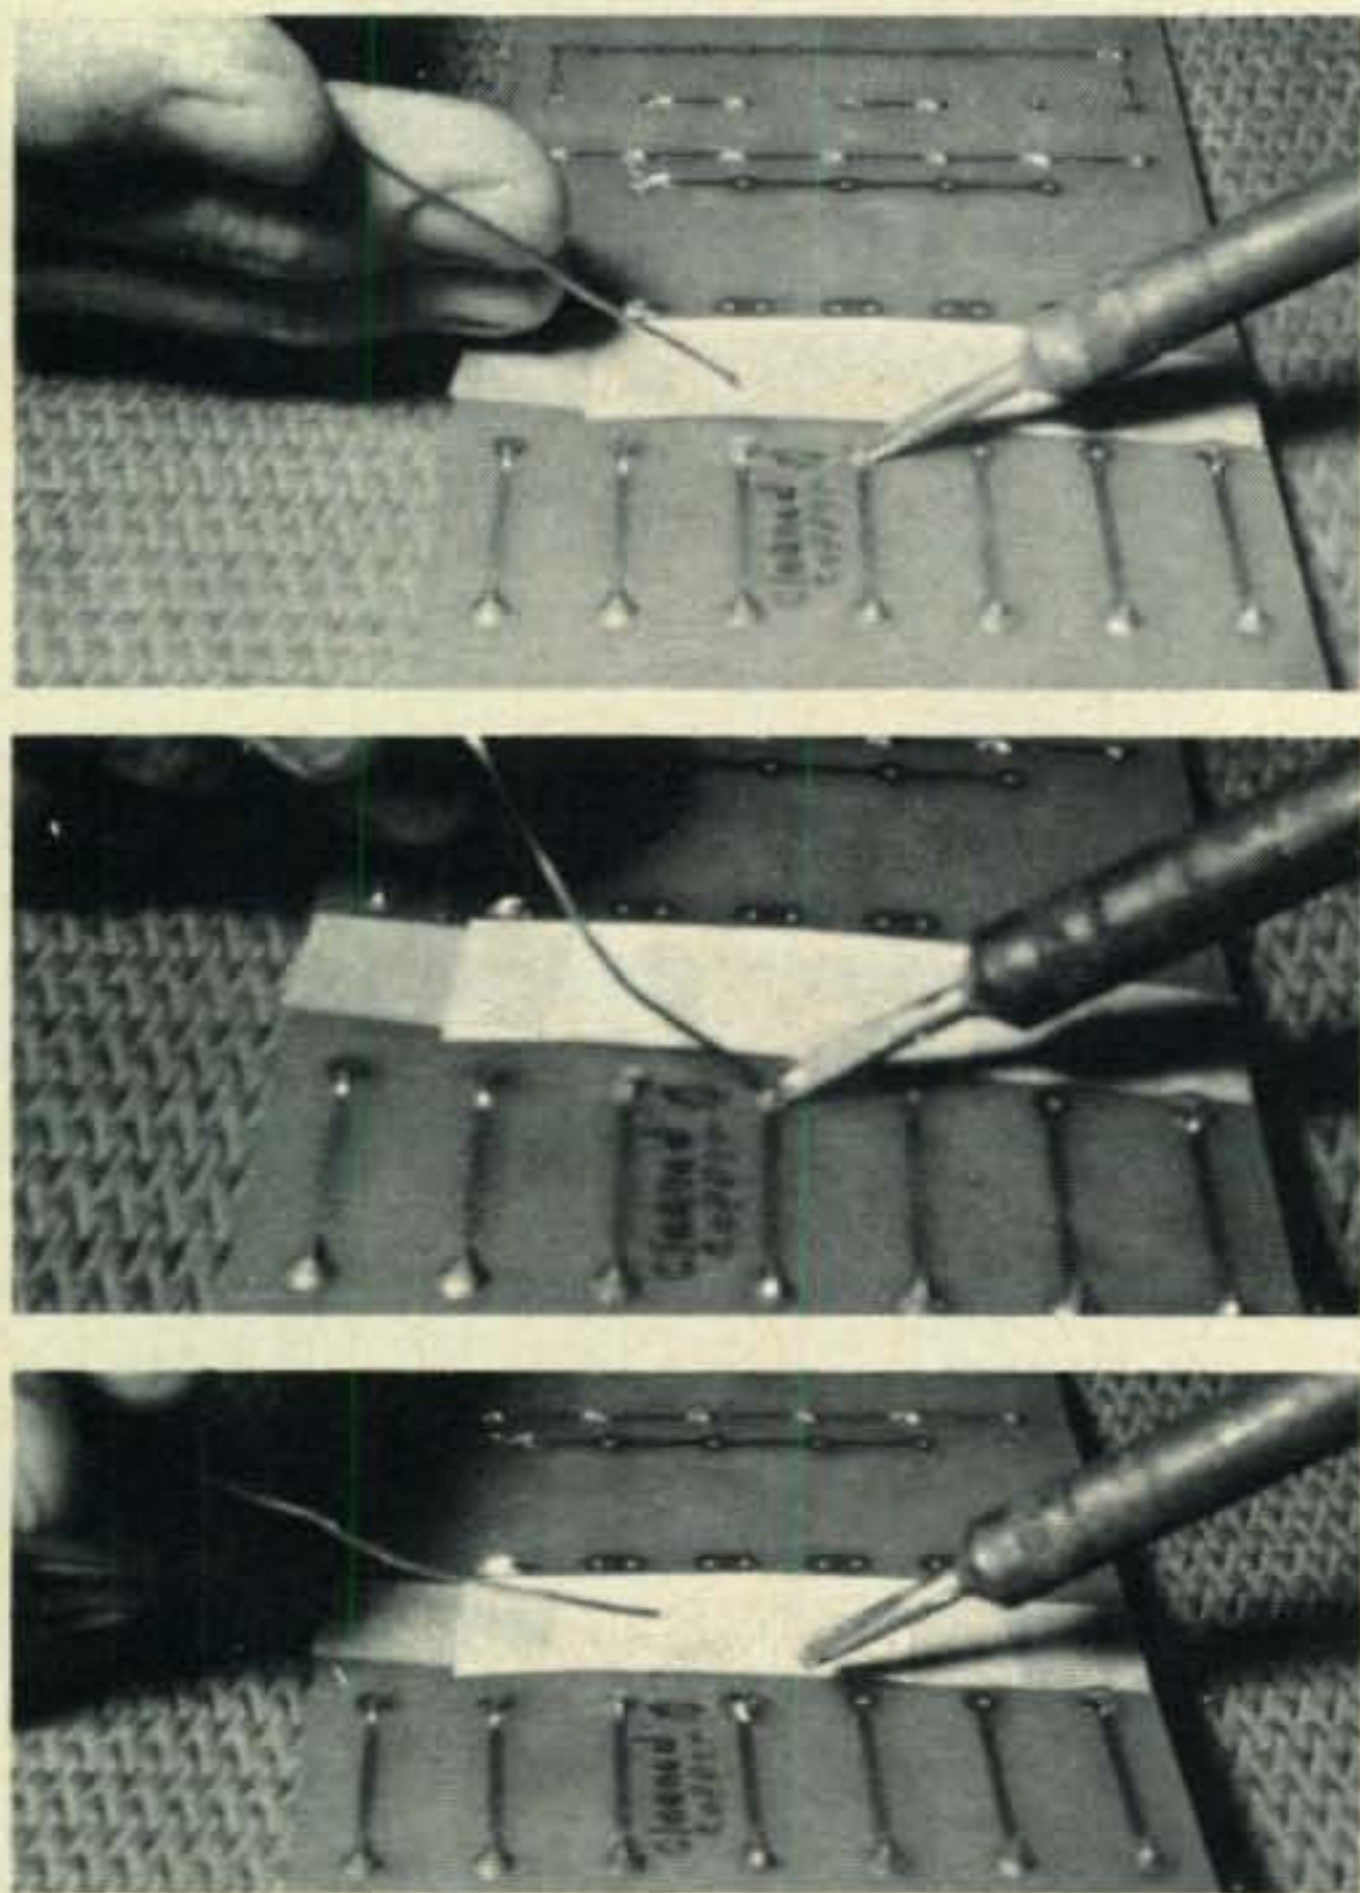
The three steps in soldering: (A)—Apply soldering iron to the joint. (B)—Apply solder to the joint and iron. (C)—Remove solder and then the iron.
